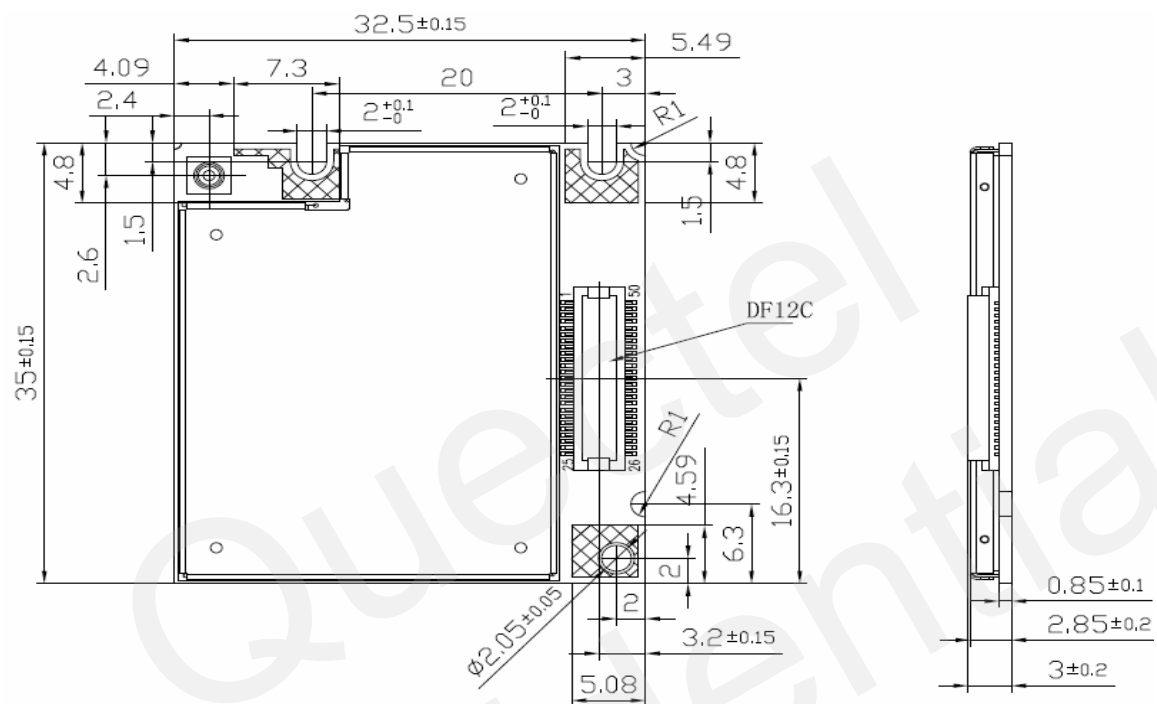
M20 TOP and SIDE dimensions (Unit: mm)
